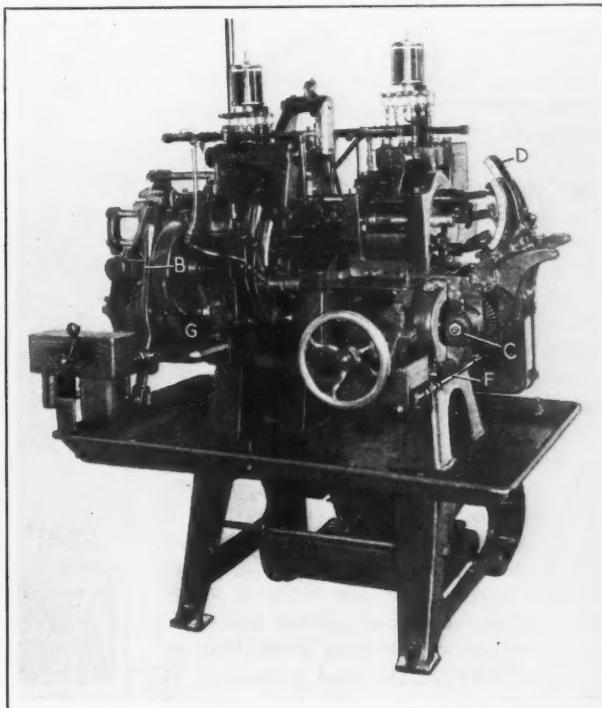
Davenport Five-spindle Automatic Screw Machine
